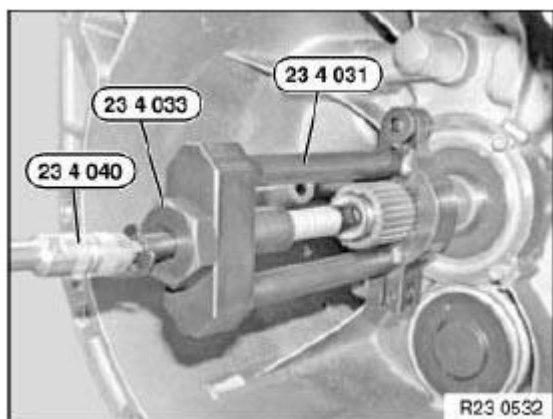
Identifying Special Tools 23 4 033, 23 4 031 And 23 4 040
